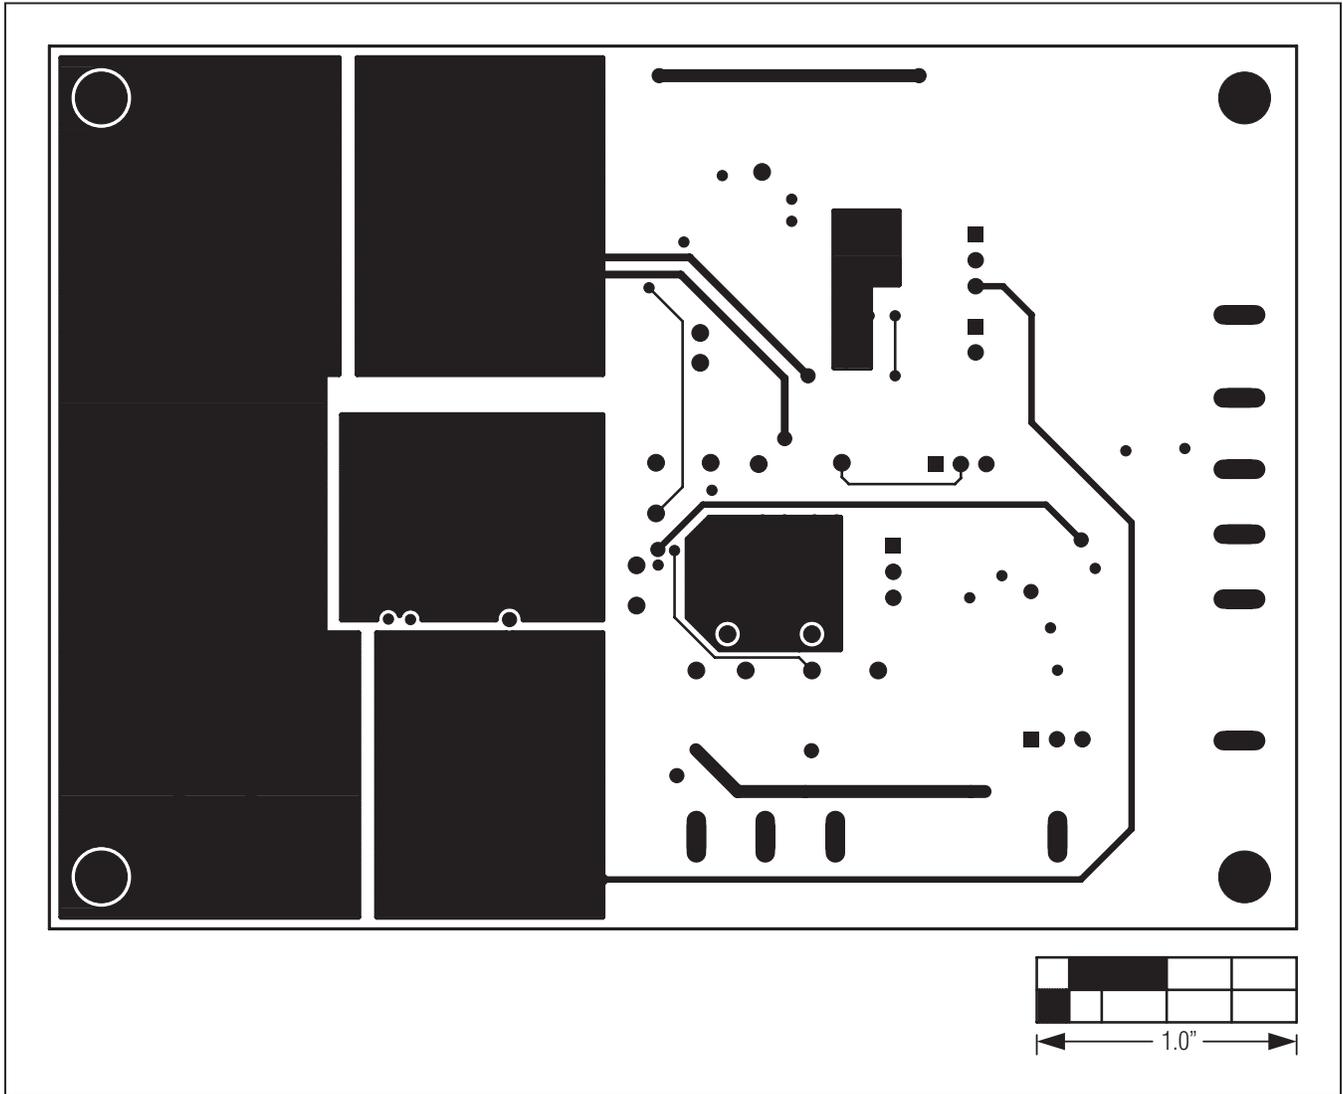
MAX5977A EV Kit PCB Layout—Solder Side
